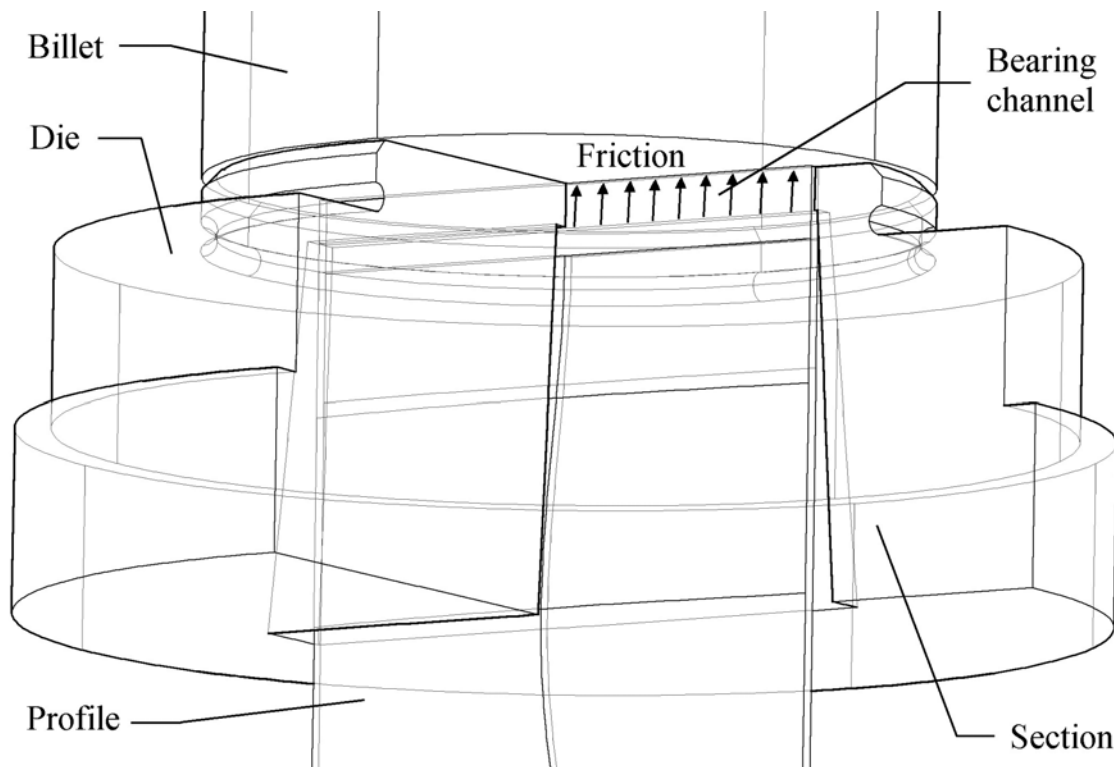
A die for extrusion of thin strips in the laboratory of SINTEF Materials Technology. A section of the die has been removed to allow the profile to be viewed also in the bearing channel. The bearing channel is here of uniform length along the circumference of the outlet.
